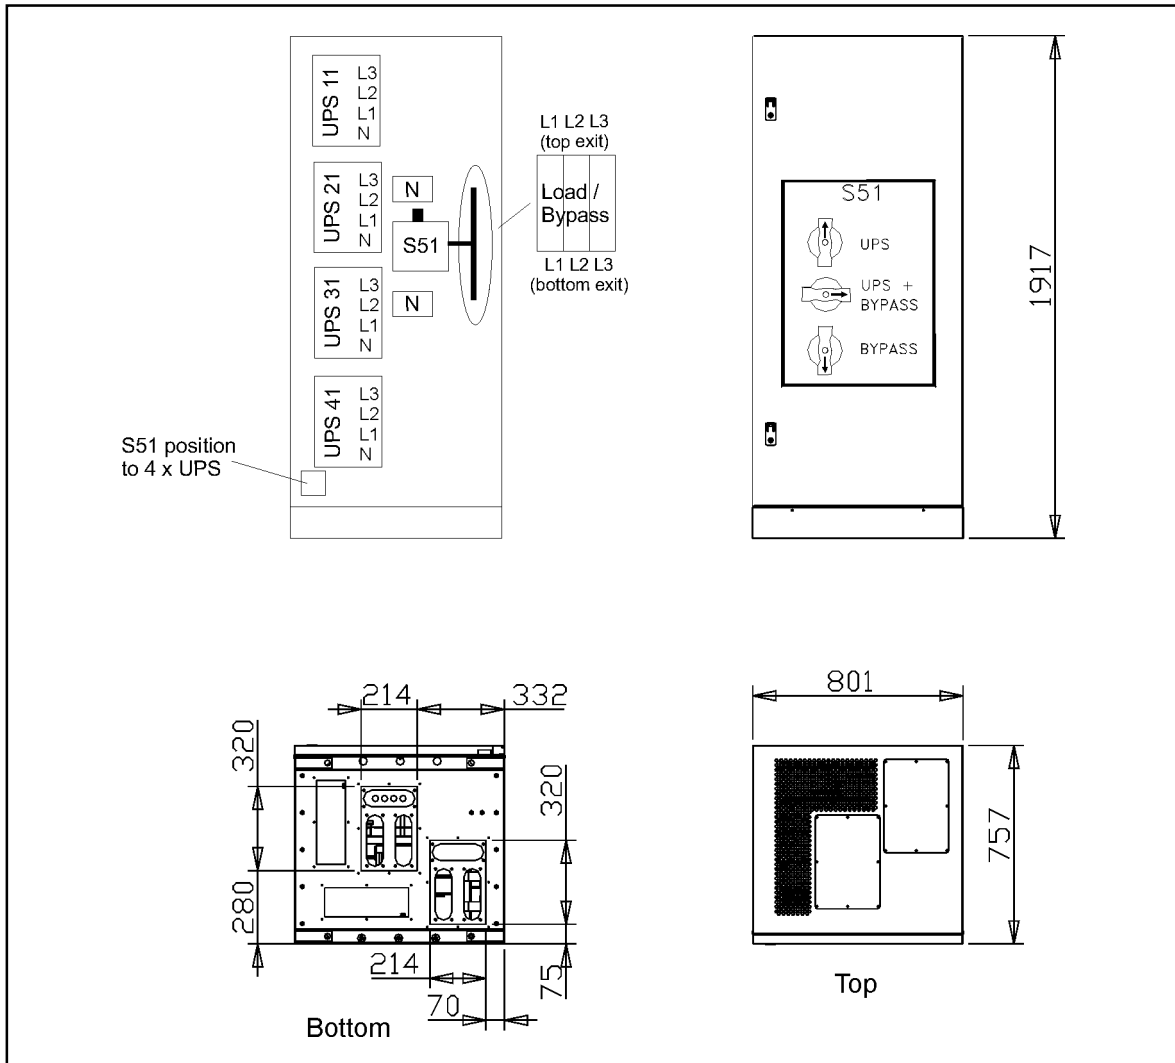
Dimension drawing for the manufacturer's SPM9340 cabinet.
